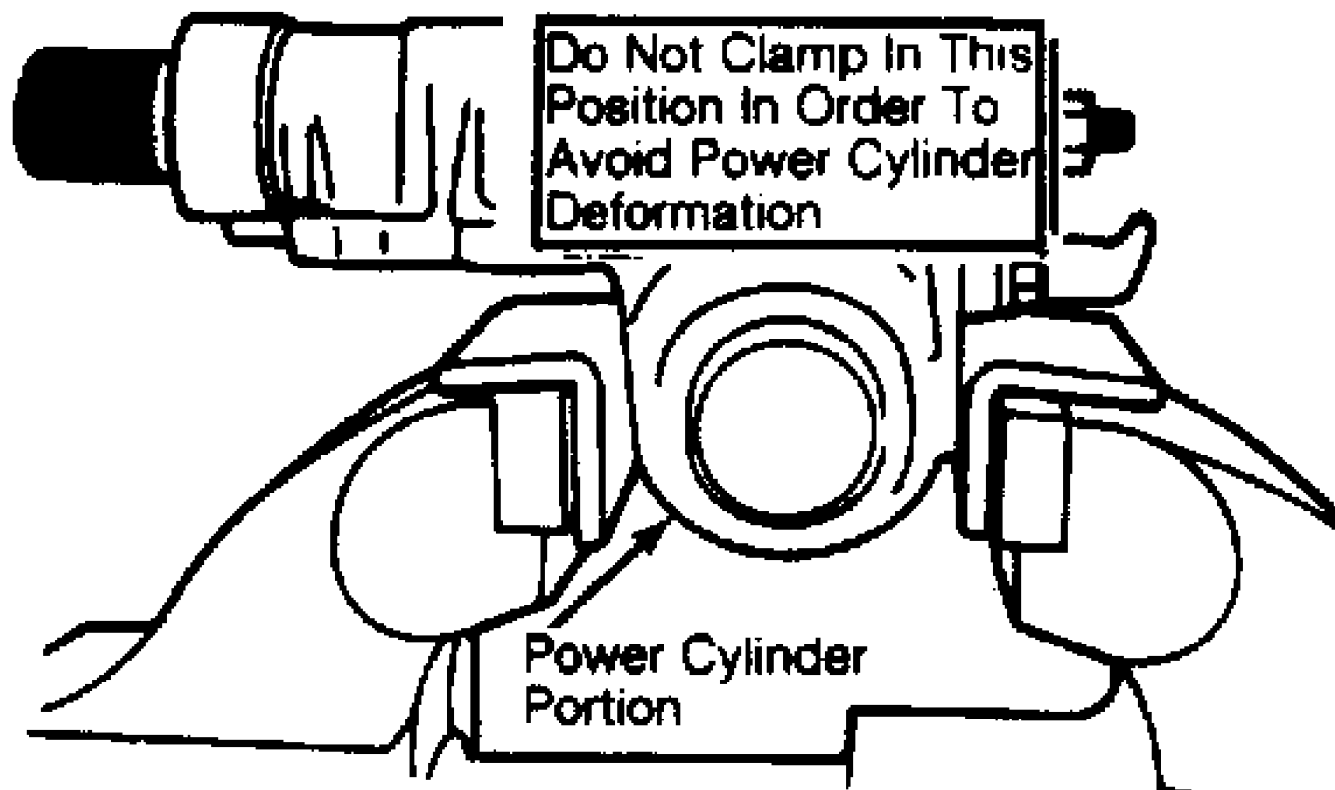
Incorrect Clamping of Power Steering Gear Assembly
